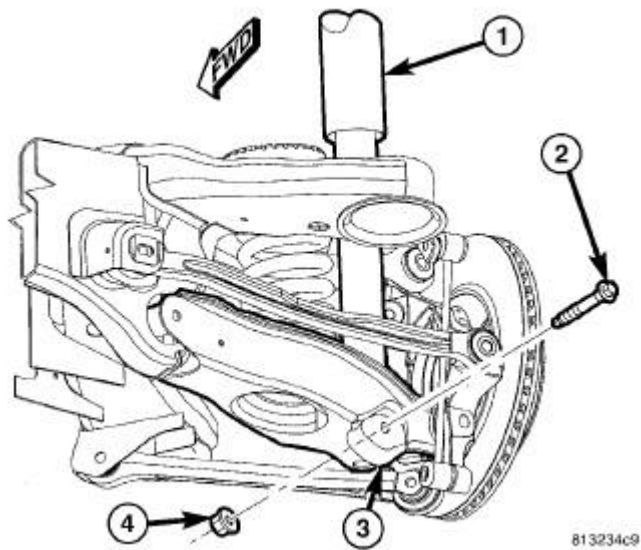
Shock Absorber Lower Mounting Bolt & Nut
